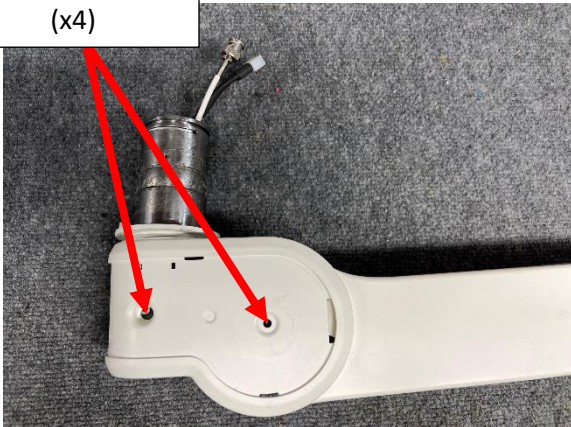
Preparing LCH Spring Arm with Camera - Screw Removal
